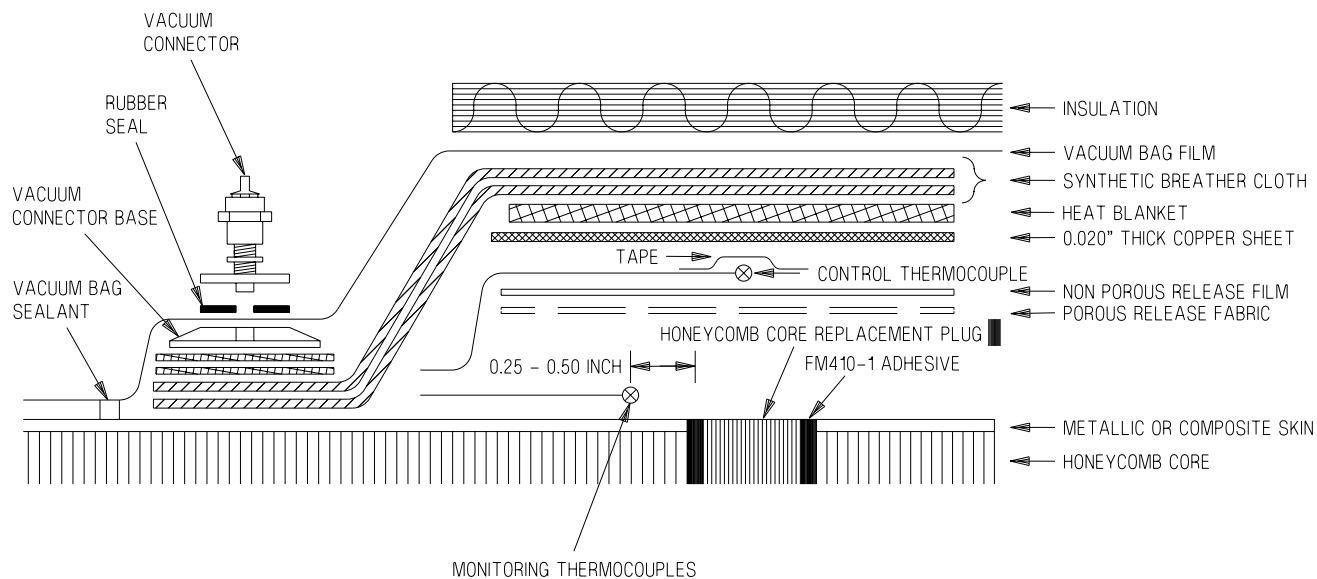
Curing of FM404 and FM410-1 Foaming Adhesives Using 4230-103, -109 and MDA151-002 Heat Blanket (Sheet 2)
